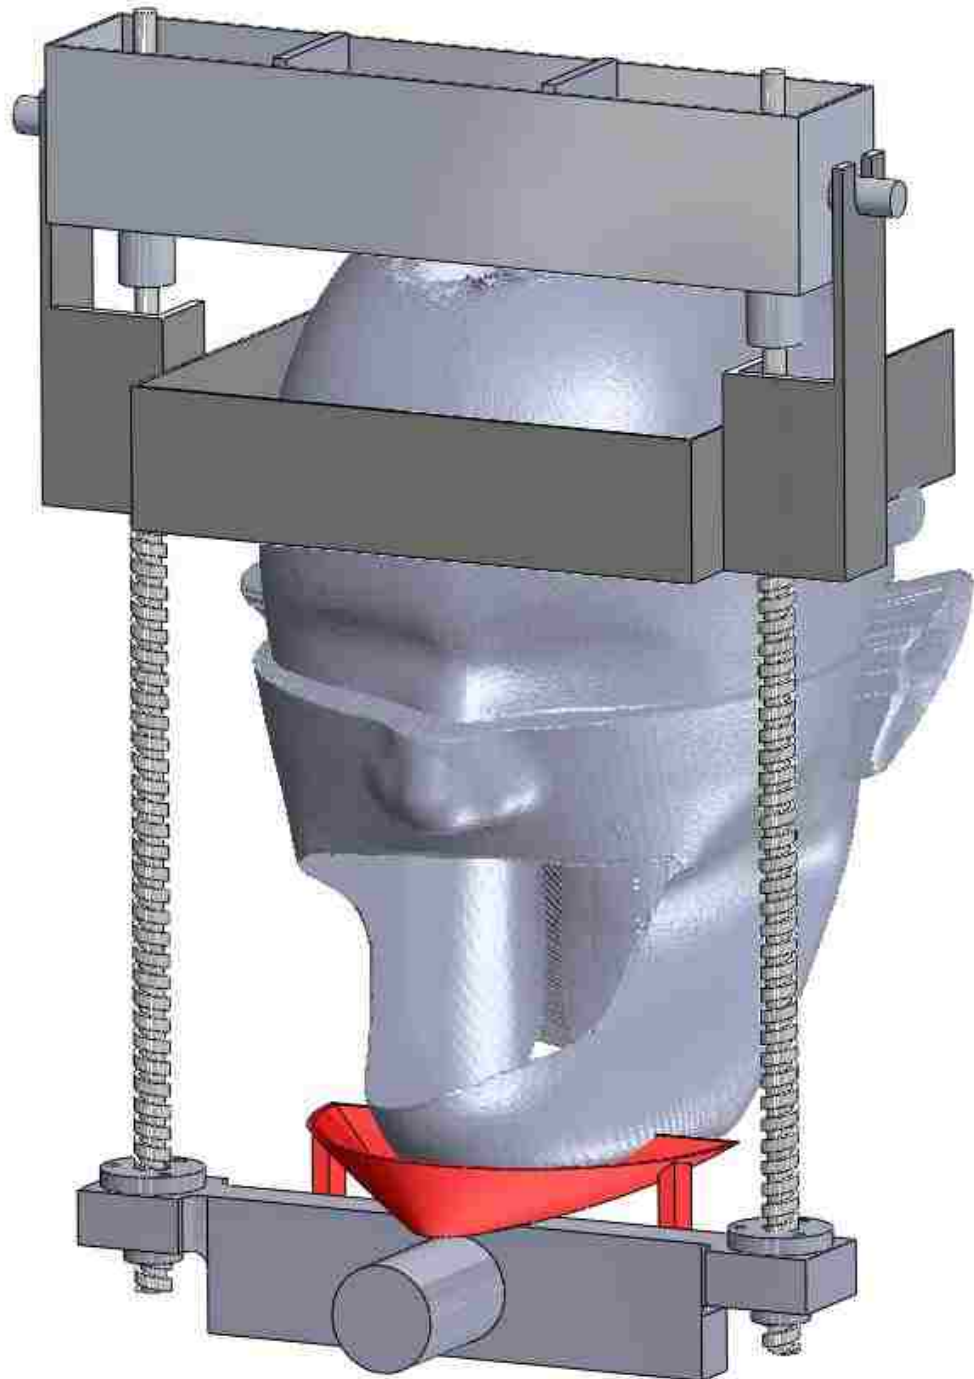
(c) Mastication robot CAD model in Dimetric view with imitation user head
